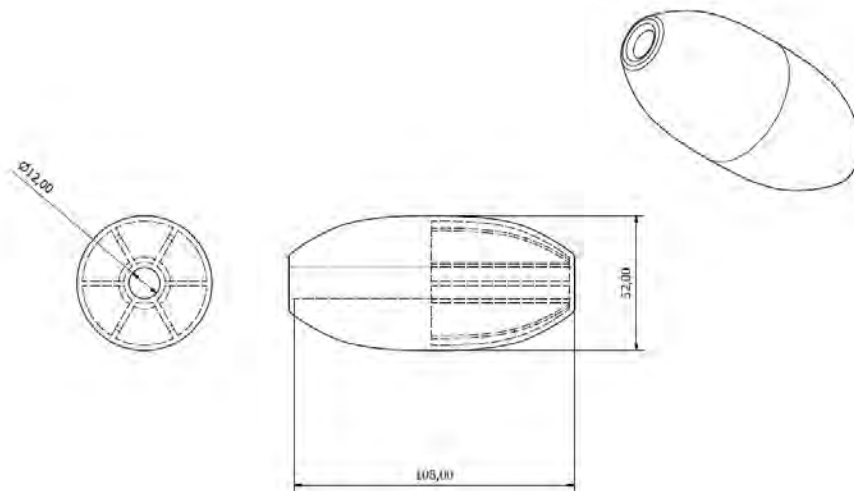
Float 3 classic - through- hole - the technical drawing.
